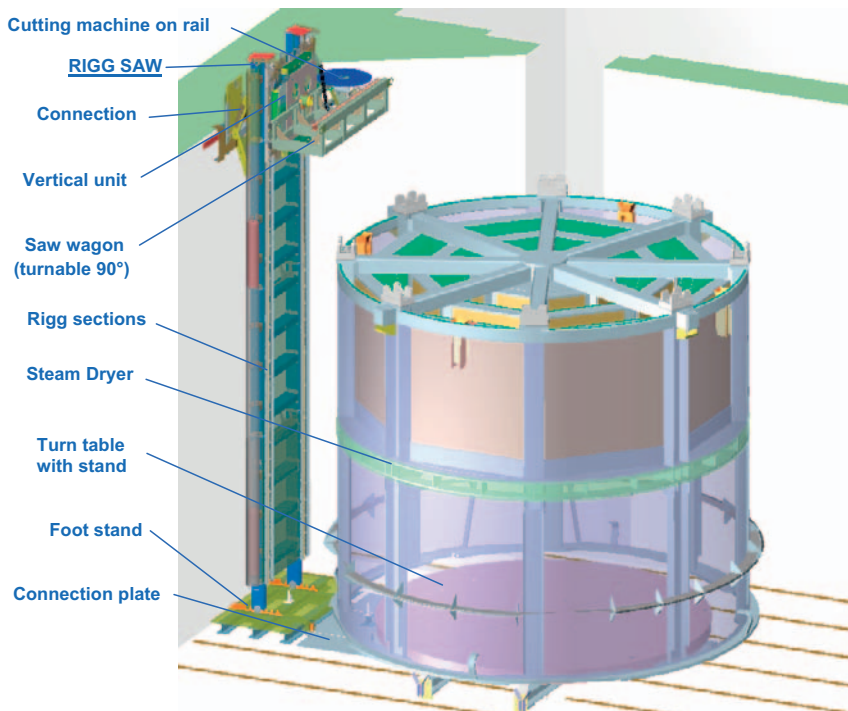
Rig saw with a disc saw mounted to cut the Steam Dryer.
